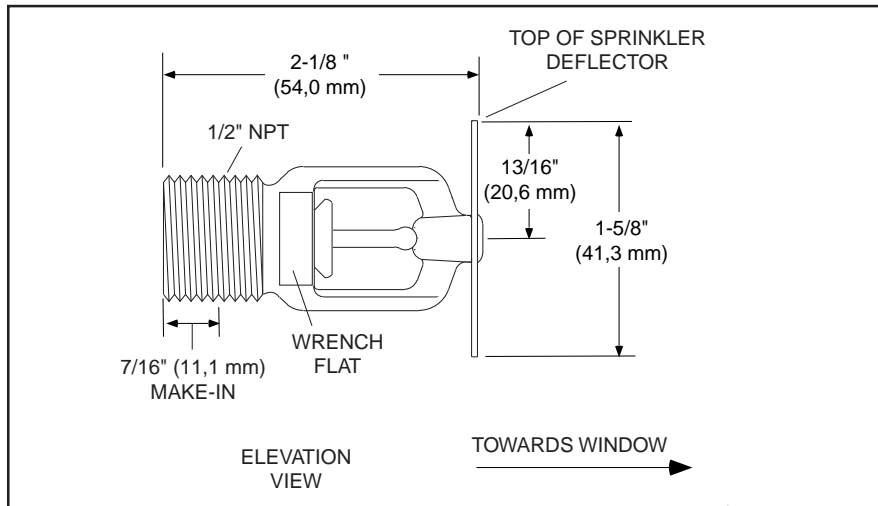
Model WS, Pendent Vertical Sidewall Specific Application Window Sprinkler
